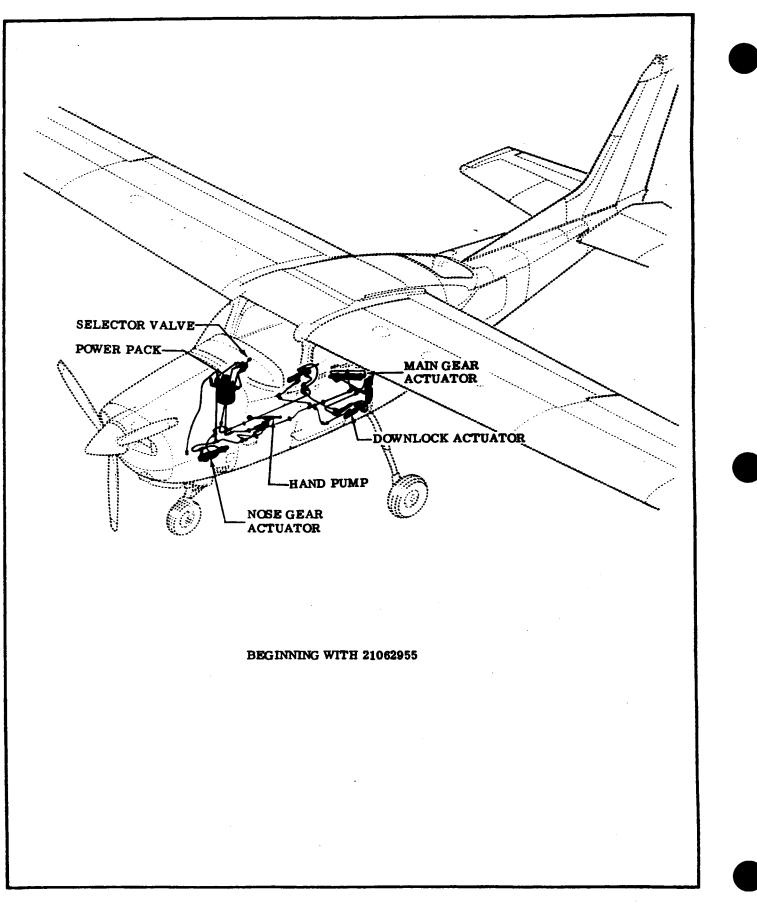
Hydraulic System Components (Sheet 3 of 3)
